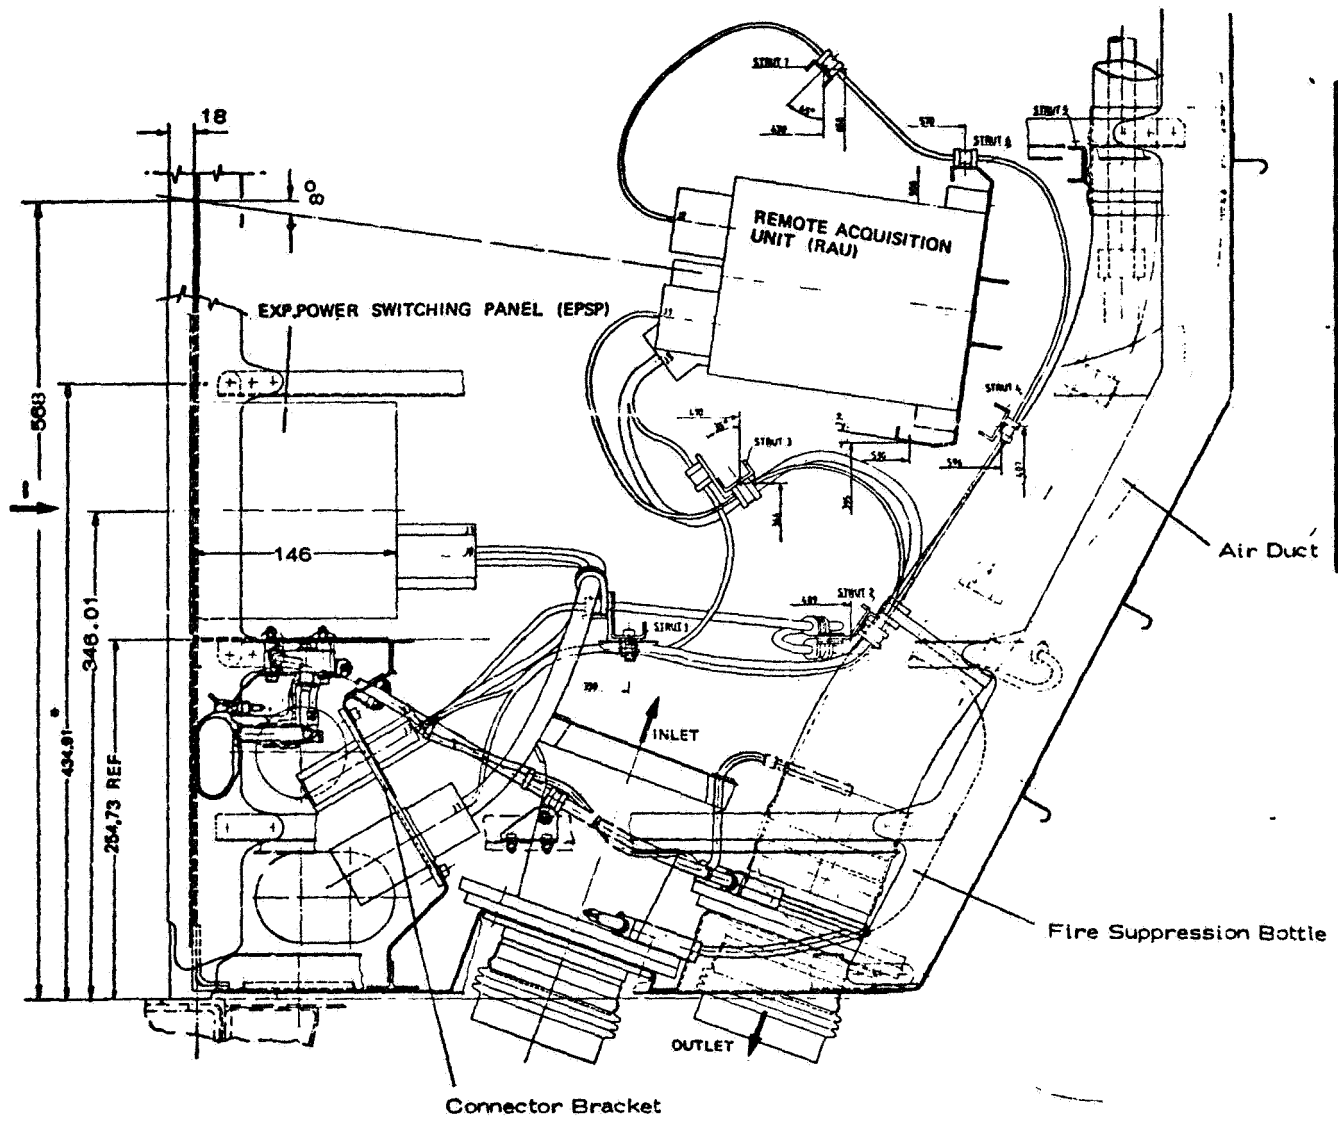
25b; Duct Details - Overview Single Rack
